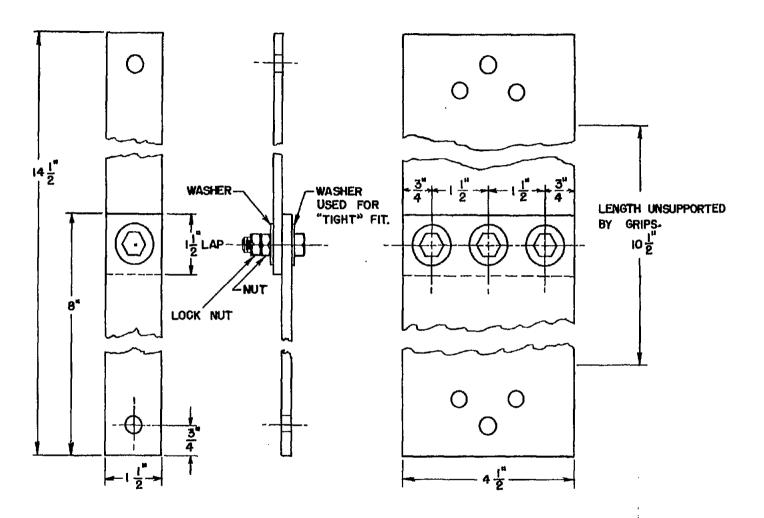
TYPICAL BOLTED - JOINT FATIGUE TEST SPECIMENS USED AT BATTELLE.
